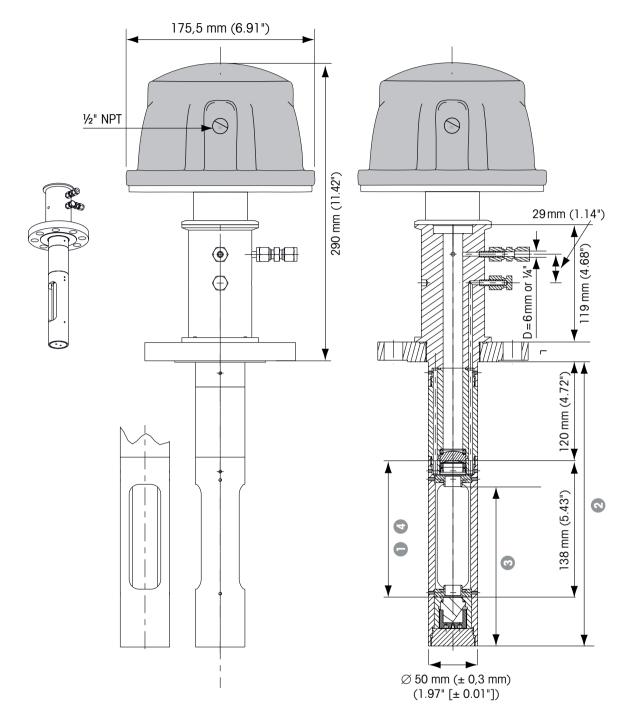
Dimensions of the non-purged probe (NP) with filter.
